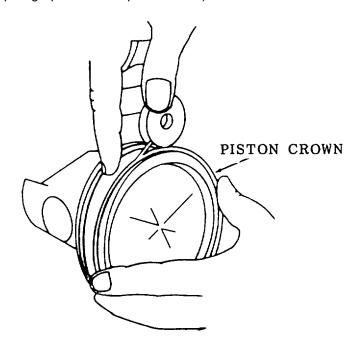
Checking Fire Ring Groove in Piston Crown Using Tool J24599.
